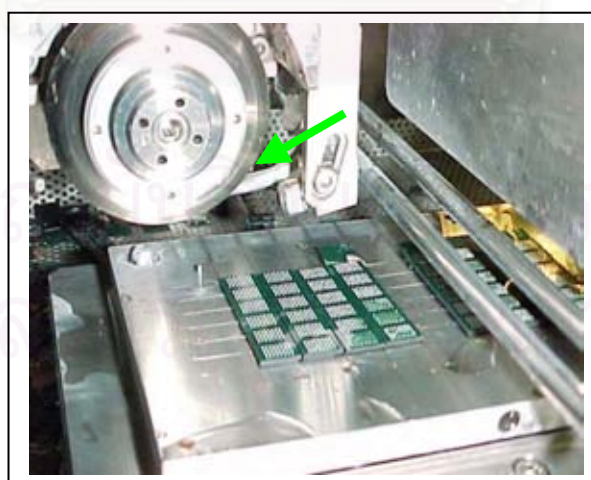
Partially Sawn Parts on Vacuum Chuck
